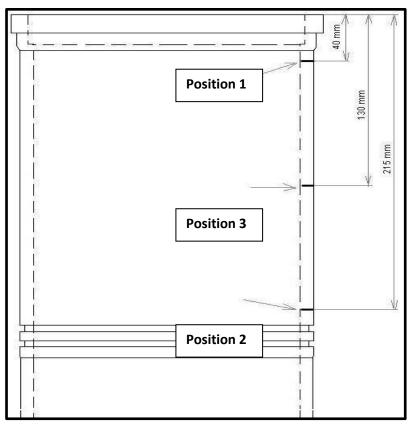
Instrumented liner with mounting distances of thermo couples
